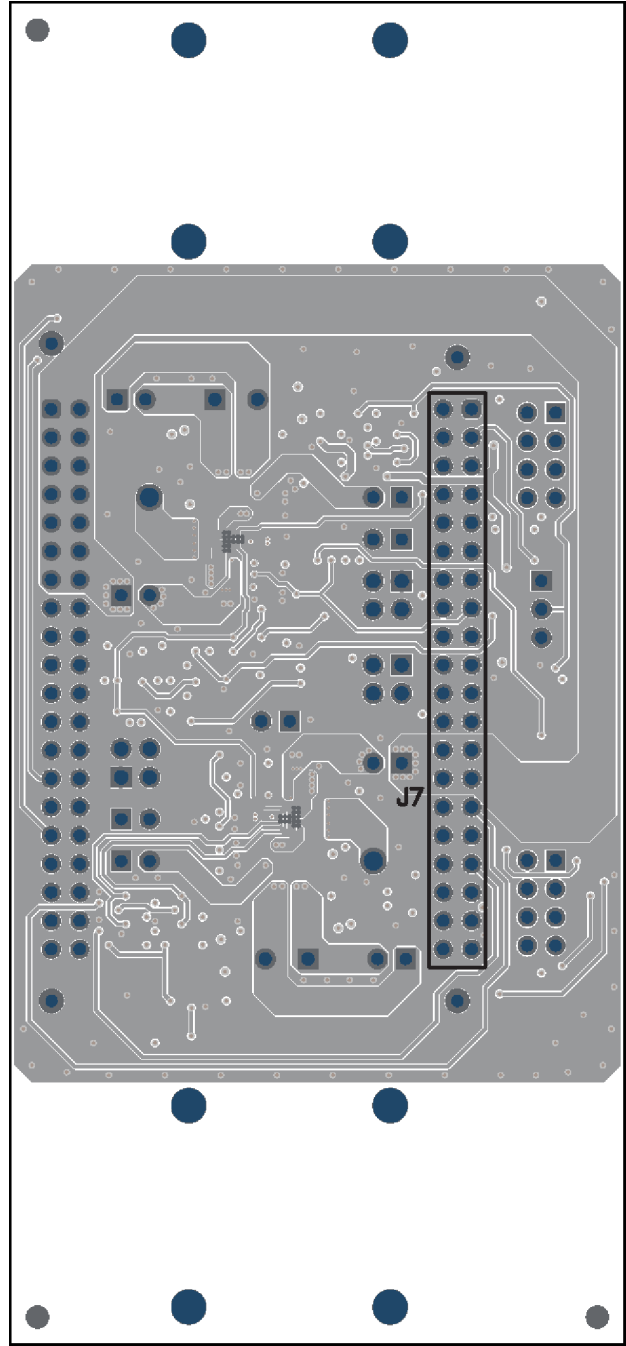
TAS2563YBGEVM-DC Bottom Assembly
